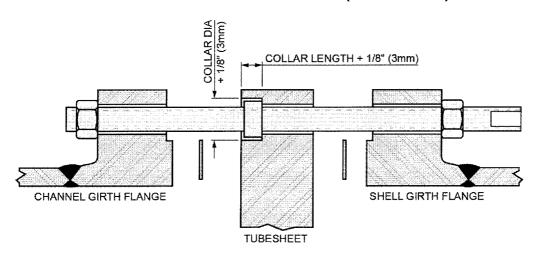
ASSEMBLY AND DRILLING DETAILS (TYPES I AND II)
